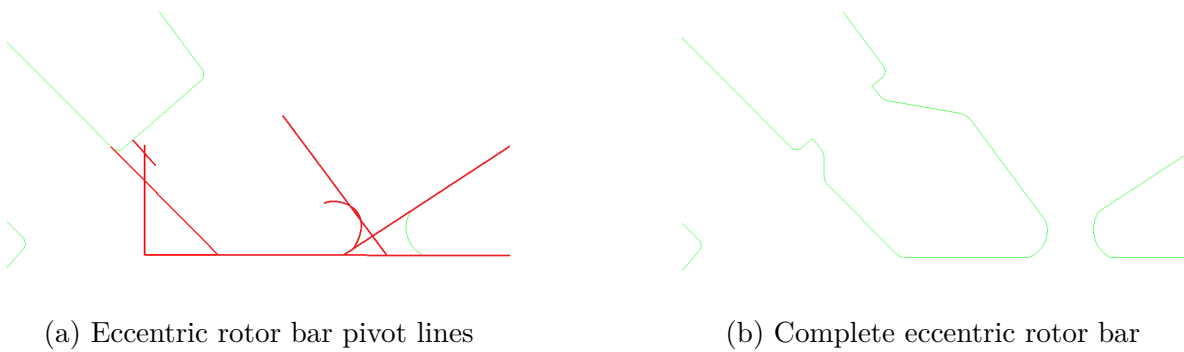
Drawing of one eccentric-shaped rotor bar slot.
